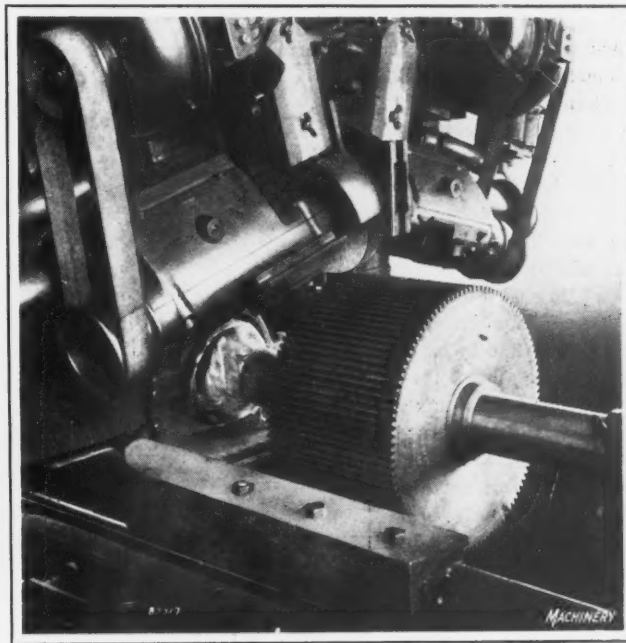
Grinding a Wide Gear on Machine of Type shown in Fig. 10
